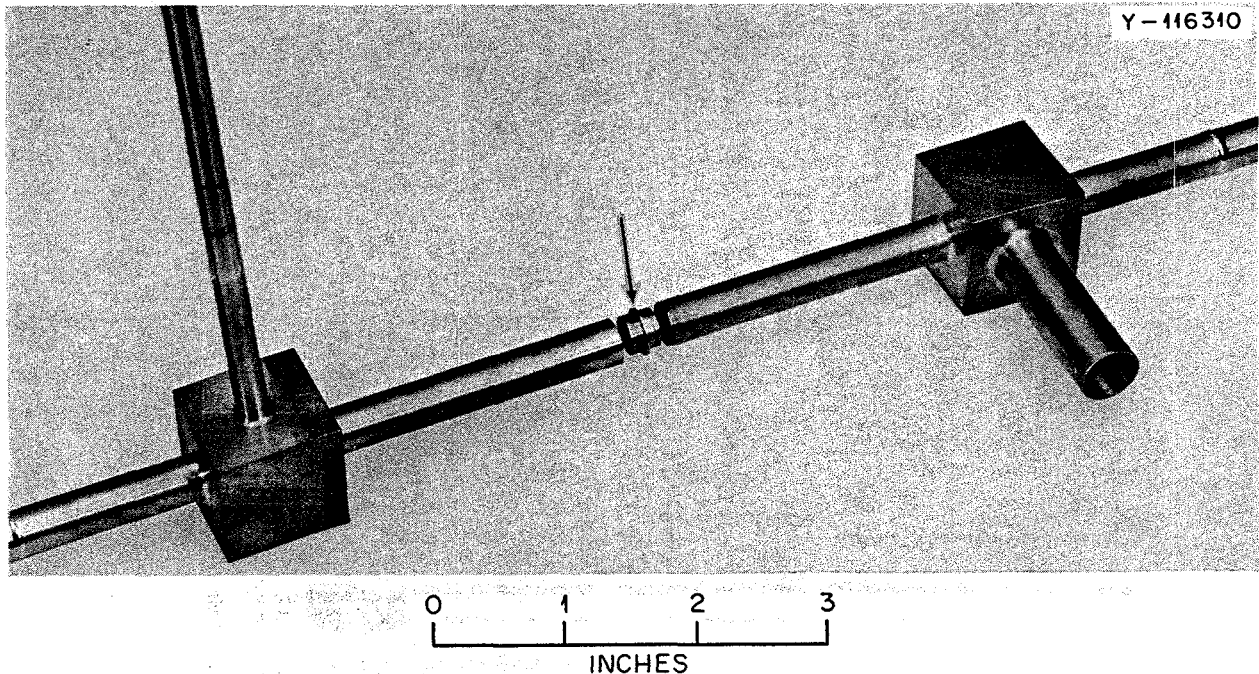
Tubes ( $\frac{1}{4}$  and  $\frac{3}{8}$  in. diam) welded to molybdenum tee using an orbiting-arc weld head. The weld insert that will be used in joining the two tubes is indicated by the arrow.
